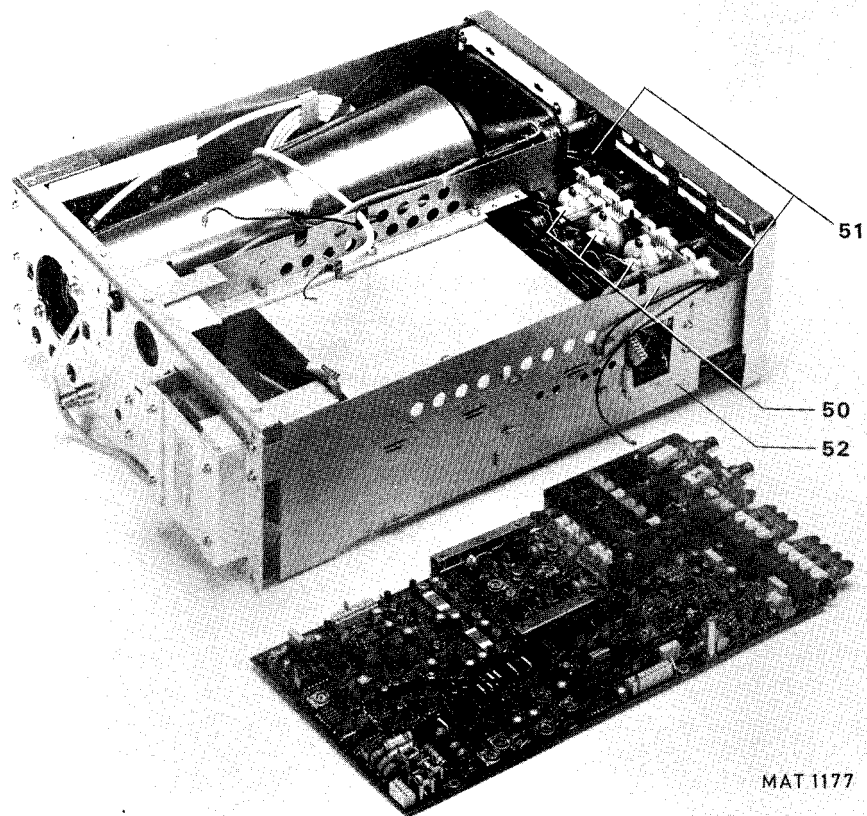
Mechanical parts, unit 3 and 4 removed
